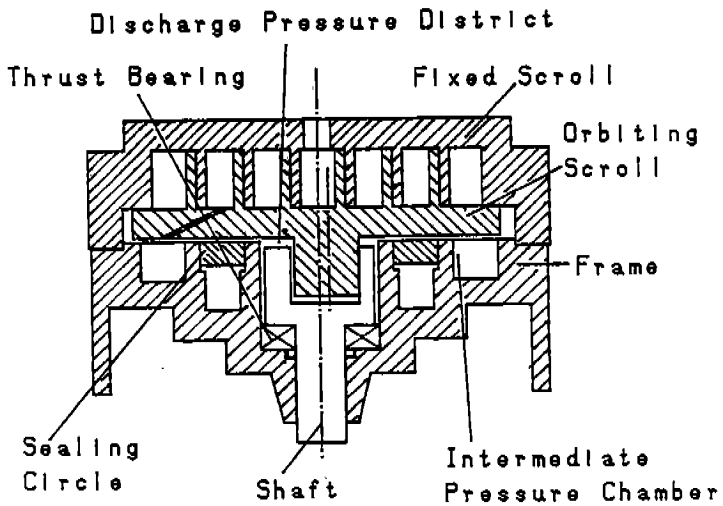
The Basic Structure of The Prototype Scroll Compressor
